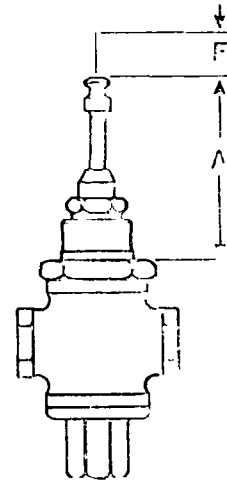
V5013A Screwed Body Dimensions in Inches (Millimeters) Refer to Table 4
